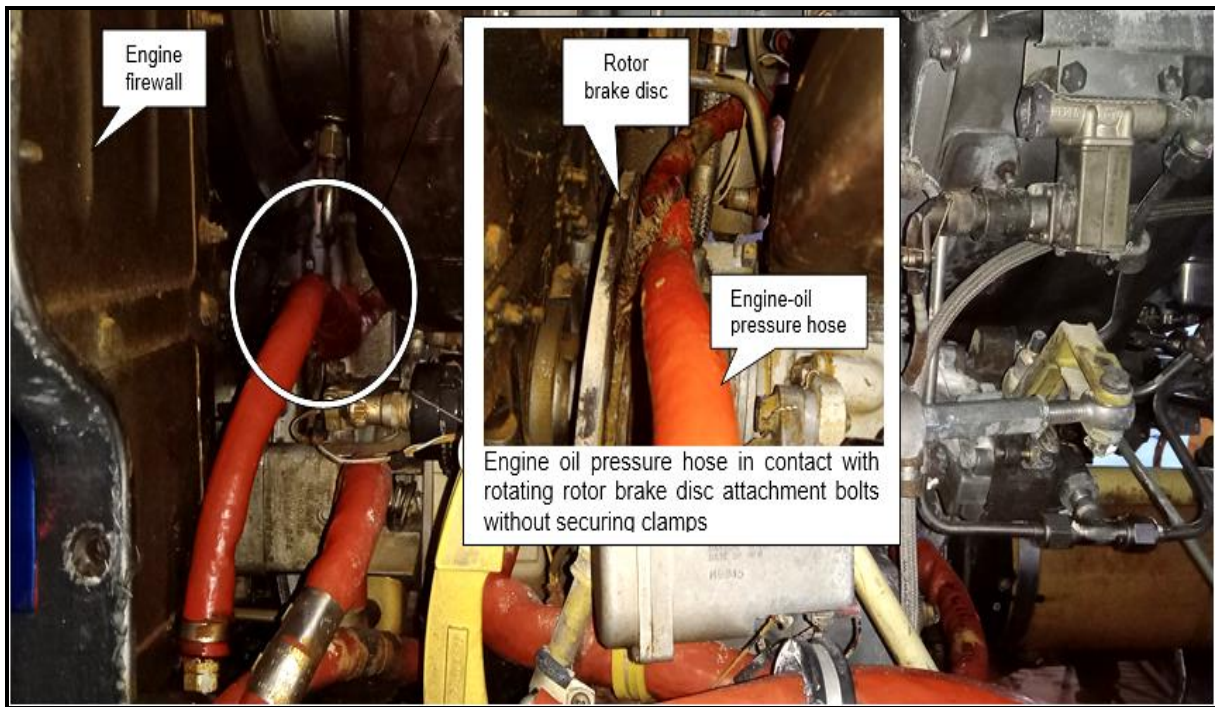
The engine oil pressure hose/pipeline chafing against the rotating rotor brake disc attachment bolt.
